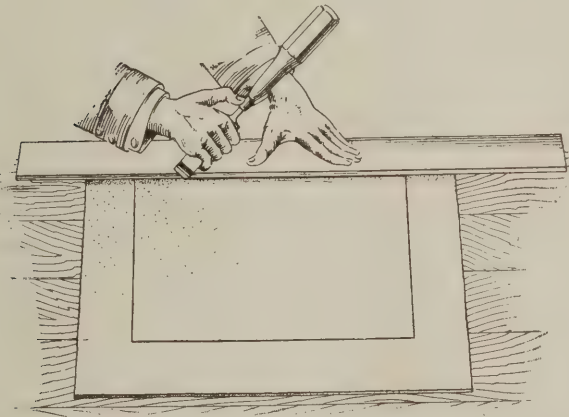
The Proper Manner of Holding Chisel in Cutting.
